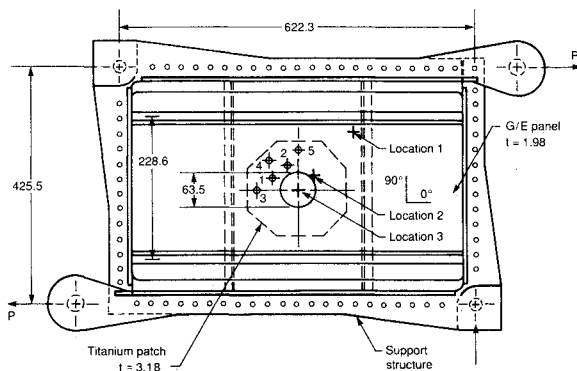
Bolted repair shear test (dimensions in millimeters; Ref. 16).
